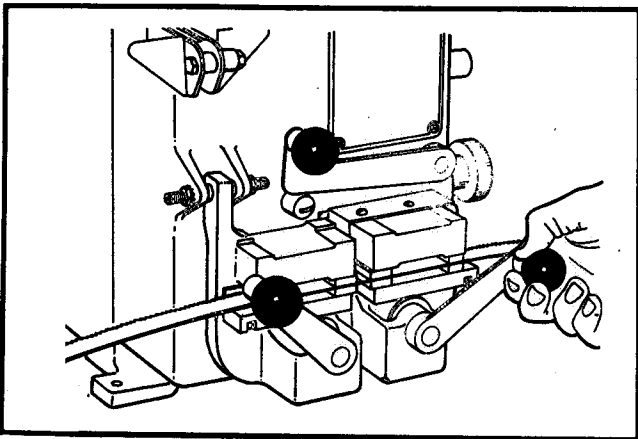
CLAMPING BAND IN WELDER JAWS.
